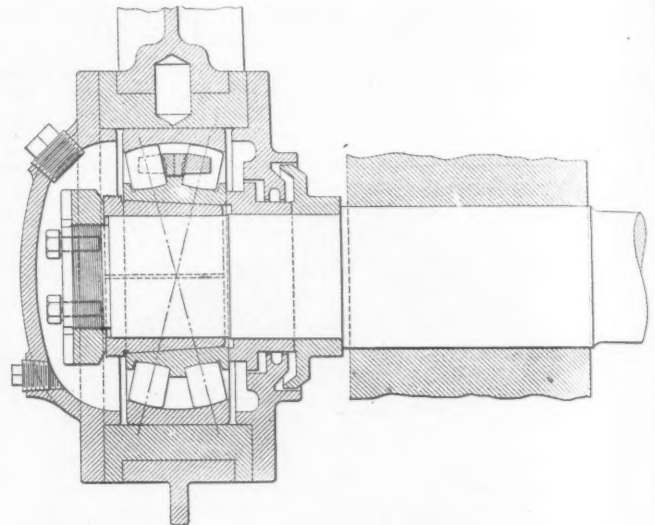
Journal Box for Motor Rail Car Equipped with Spherical Roller Bearing
